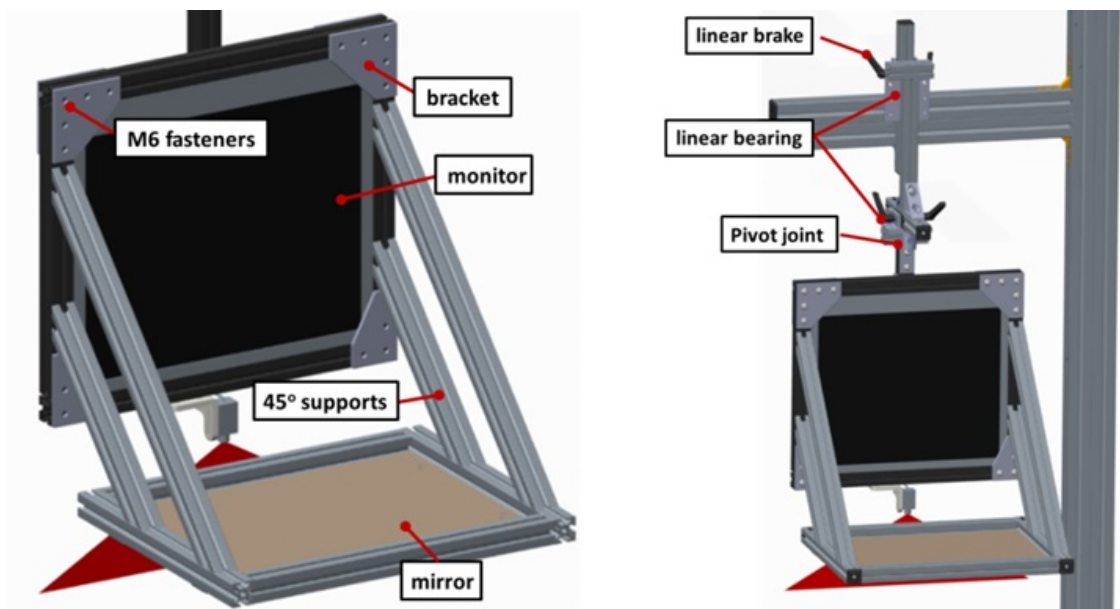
90-degree viewbox design: Left) Viewbox. Right) All joints shown.
